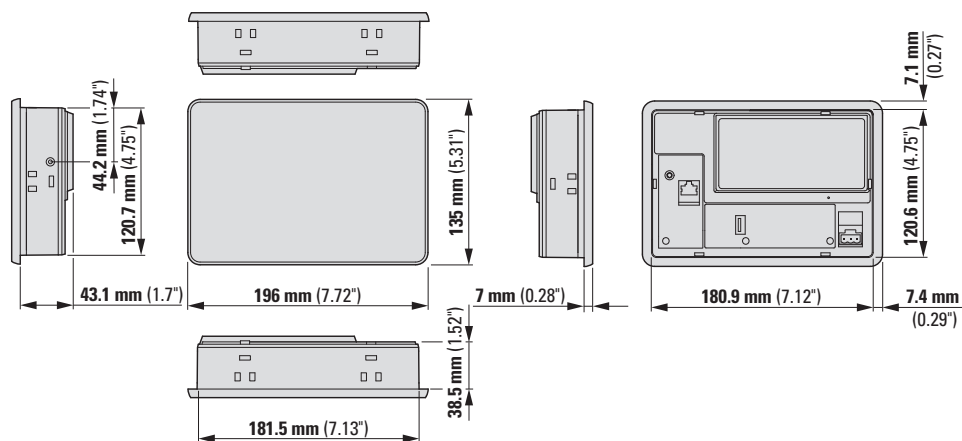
Dimensions for 7.0" front mounting devices in mm (inches)
